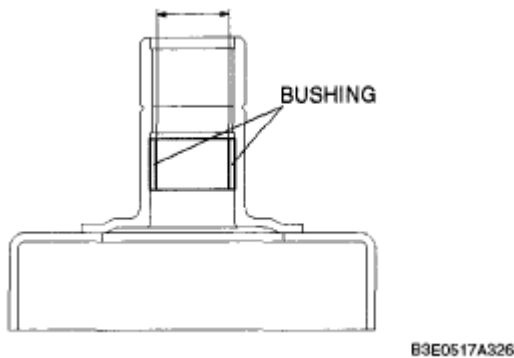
Measuring Bushing Of 3--4 Clutch Hub
